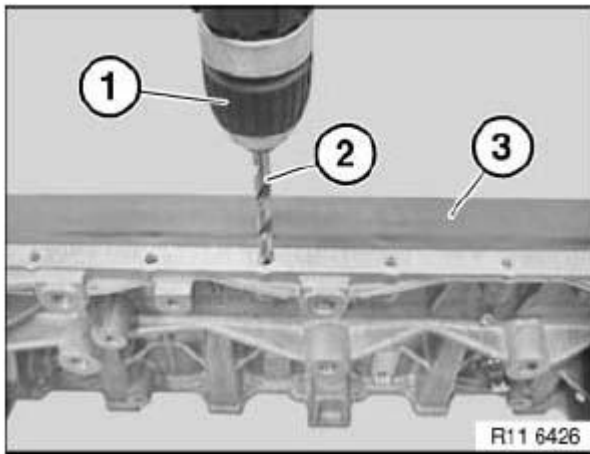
Identifying Core Drill Bit, Hand Drill And Clean Area
